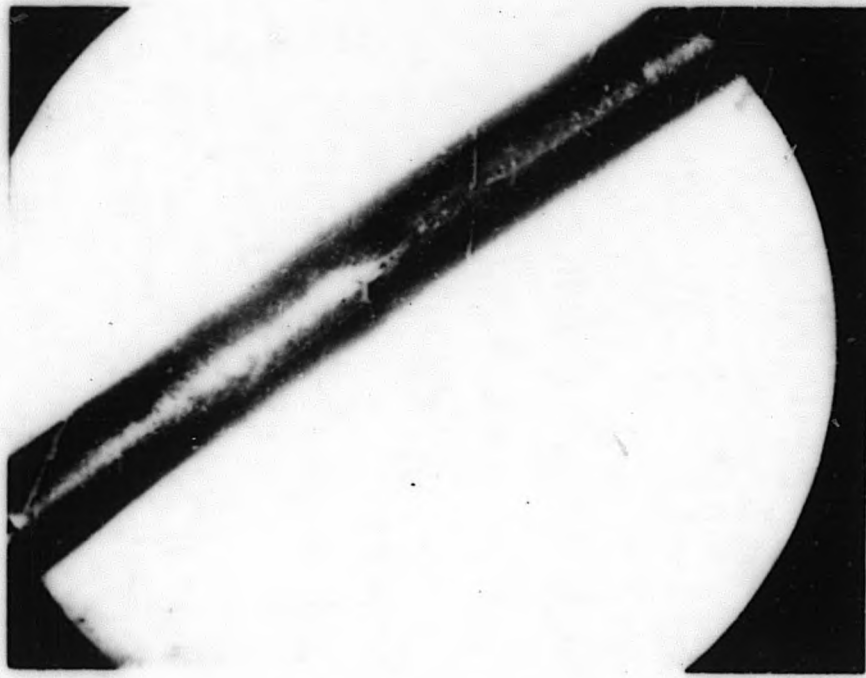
Burst Test Sample, Cold Worked HPD, Rod Q Avg. , 1G
